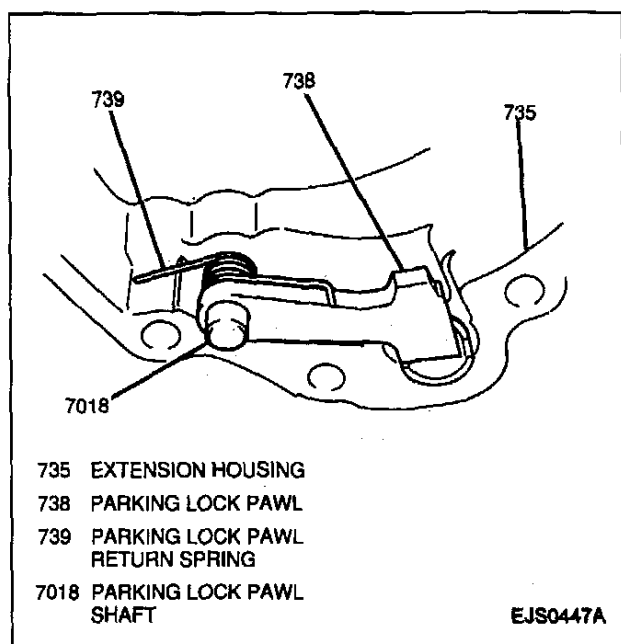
Parking Lock Pawl, Parking Lock Pawl Shaft and Return Spring (3L30, 3-Speed)
